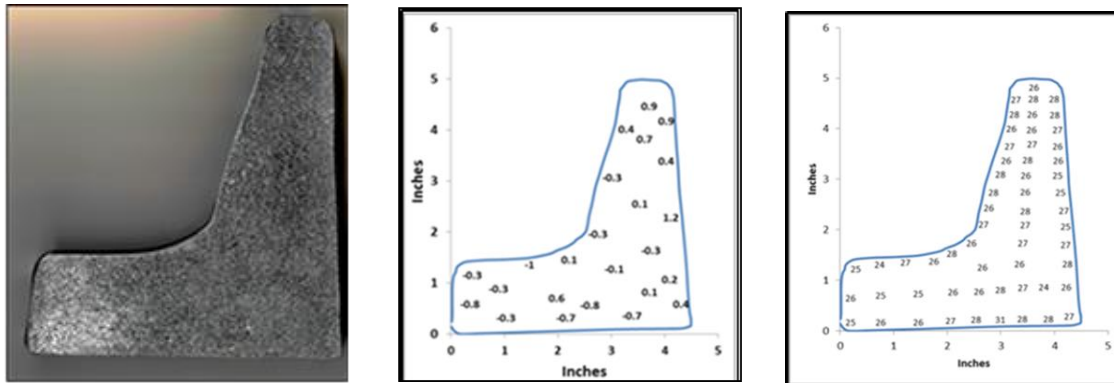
Left: Etched cross-section of weld neck flange, Center: Grain size map, Right: Hardness map.
